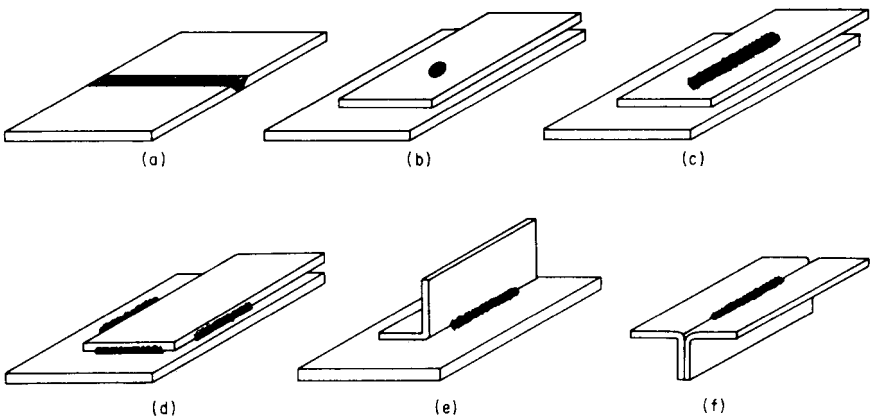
Types of sheet-steel welds: (a) square-groove weld; (b) arc spot weld (round puddle weld); (c) arc seam weld (oblong puddle weld); (d) fillet welds; (e) flare bevel-groove weld; (f) flare V-groove weld.
